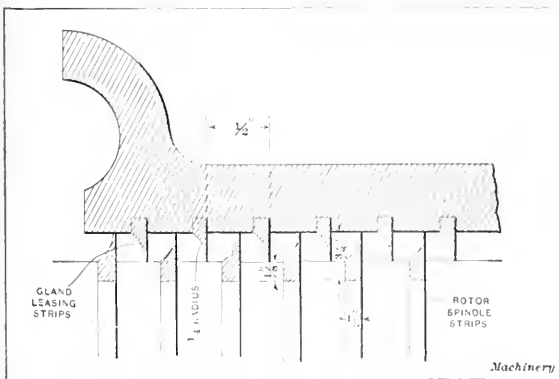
Spindle of the Rotor and the Gland Strip Casing
